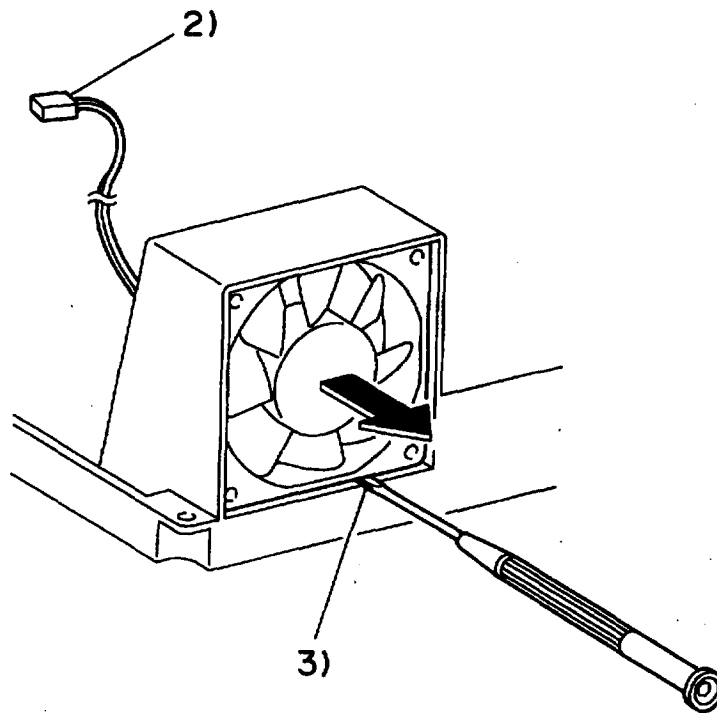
Removing the Exhaust Fan from the Bottom Cover
